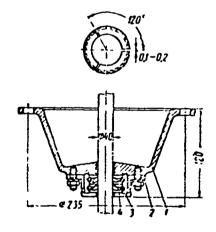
Oil gland: 1 and 2) cups; 3) spring; 1) ring.
